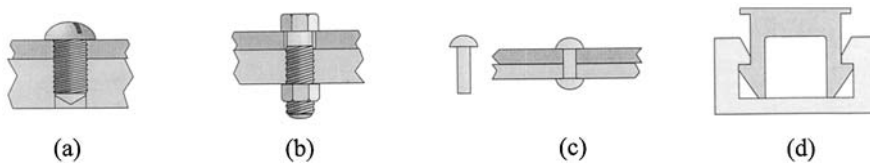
Mechanical assembly using (a) a screw, (b) a bolt, (c) a rivet, and (d) a snap-fit joint.
